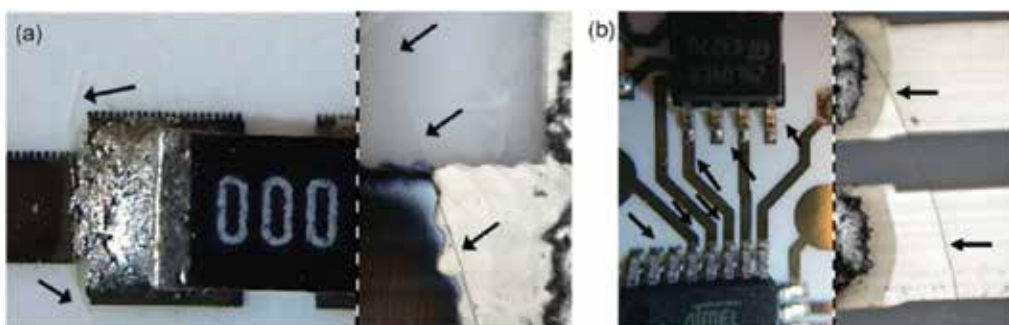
(a) Cracks left on the paper coating, on the printed lines and at the soldering, indicated by arrows, for a 0805 packaging component (b) similar issues for QFP and SOP packages, showing that the problematic is insensitive of packaging type and, up to a certain extent, size insensitive. Image adapted from [39] with authorization.
